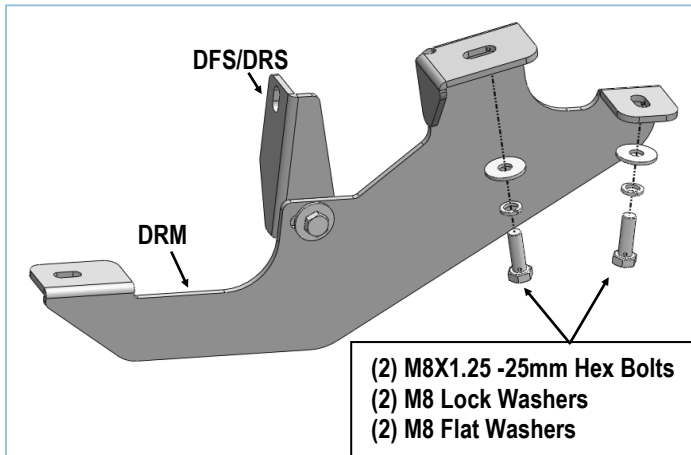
Tighten Hex Bolt To Collapse And Lock Rivet Insert Into Factory Hole
